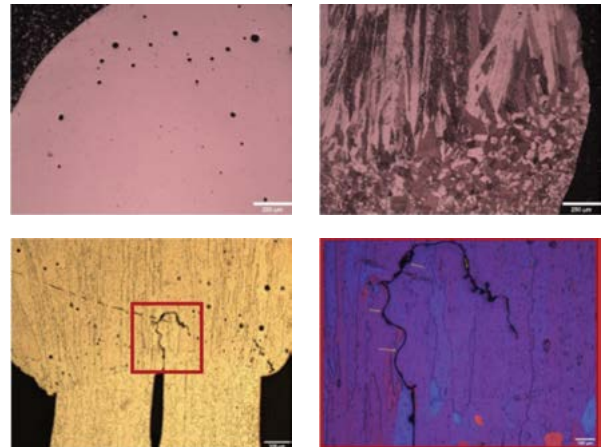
(a) As polished Cu hairpin weld with voids, (b) Etched microstructure at weld base material, (c) Al hairpin weld - etched, (d) Crack in the hairpin weld on Aluminium hairpin
